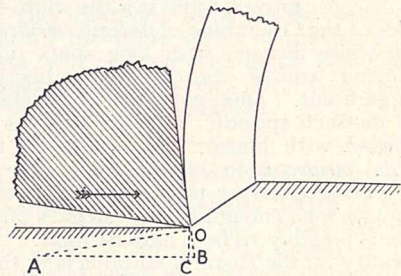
OA, normal force on face of tool; BO, frictional force on face of tool; OC, component of OA tending to make the tool "dig"; CO, component of BO tending to make the tool lift.
